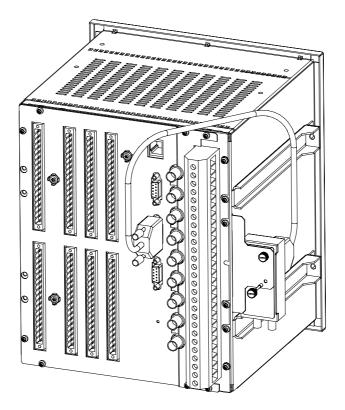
1 Dimensional drawing of the bus connection module RER 123
